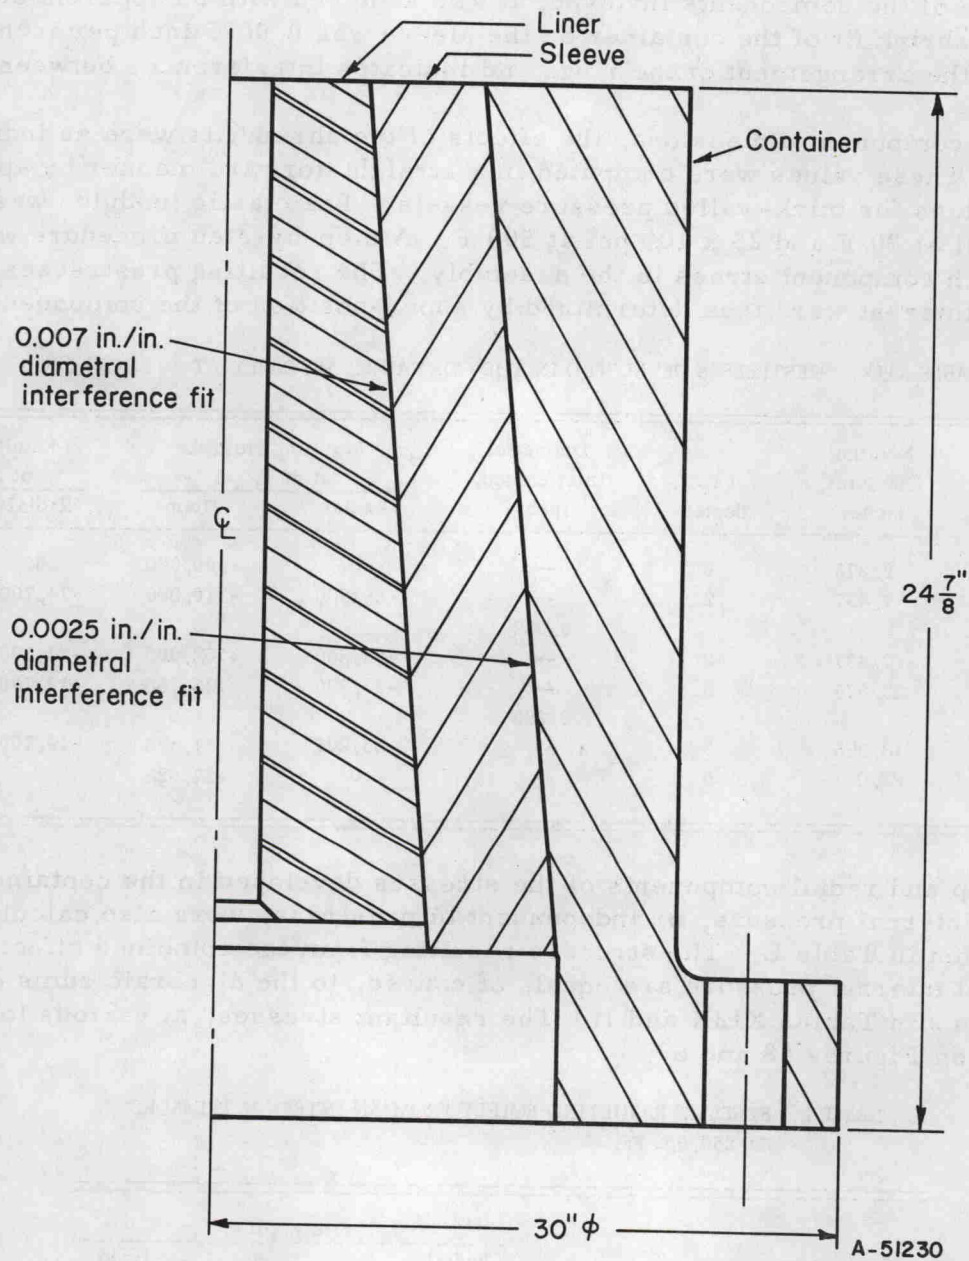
CROSS-SECTIONAL VIEW OF CONTAINER I
